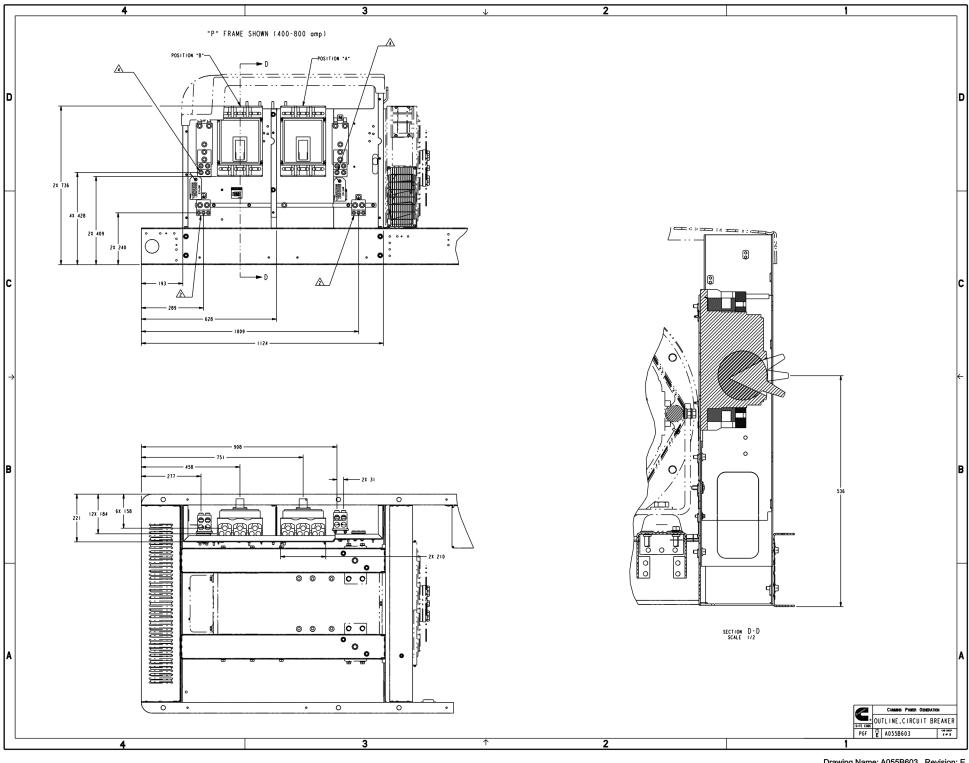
CIRCUIT BREAKER OUTLINE DRAWING (SHEET 4 OF 6)
